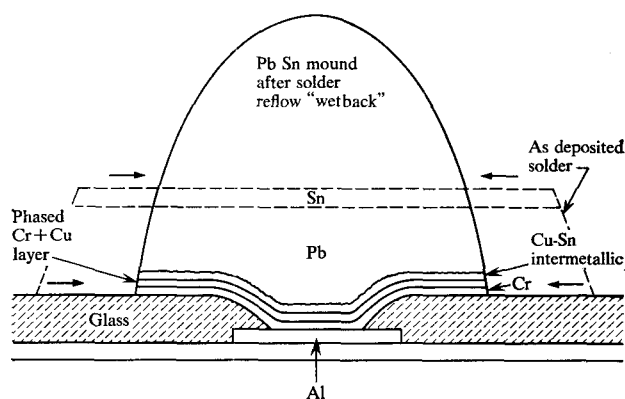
Solder wet-back scheme for solder pad formation on chips to be used in "controlled chip collapse" terminal connections.
